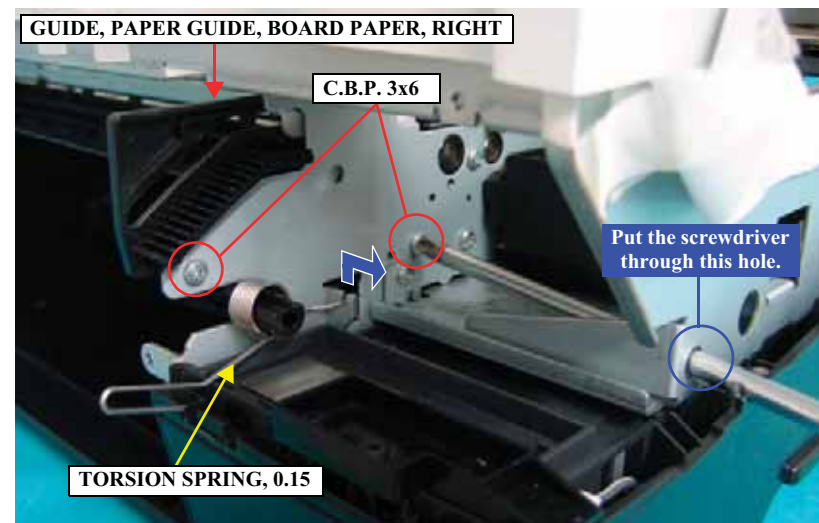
Removing the TORSION SPRING, 0.15 and the screw from the GUIDE, PAPER GUIDE, BOARD PAPER, RIGHT
